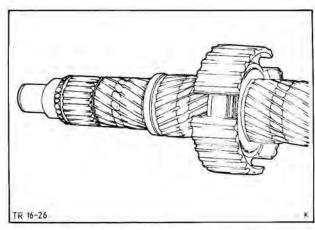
Mainshaft with 1st/2nd gear synchroniser hub
